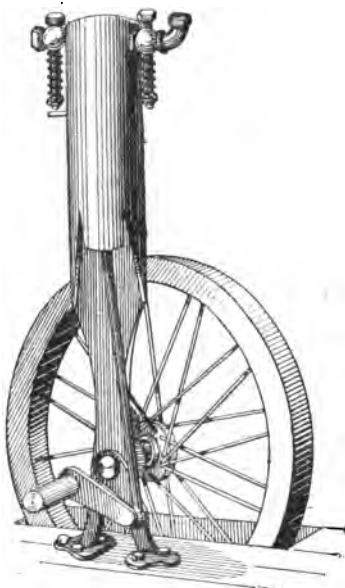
The Single-cylinder Kane-Pennington Motor.
